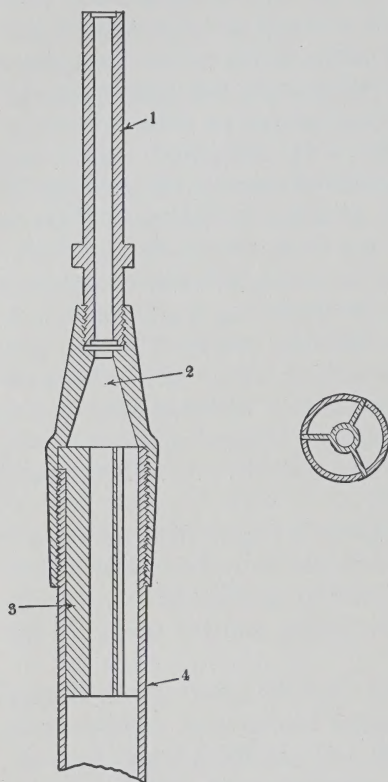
Sectional Drawing of Upper End of Worthley Nozzle.
